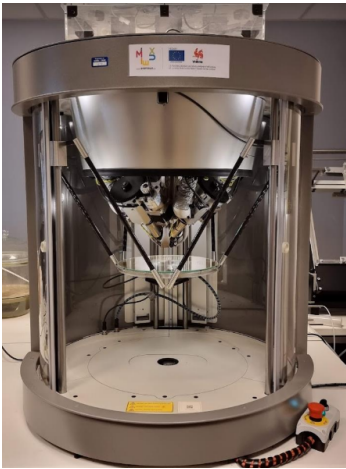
Pellets Additive Manufacturing PAM HT series from Pollen AM photography
